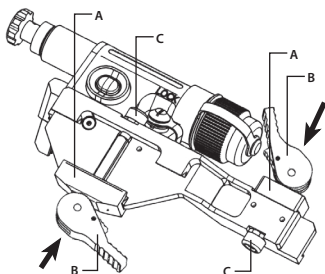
CLAMPING DEVICE ADJUSTMENT
